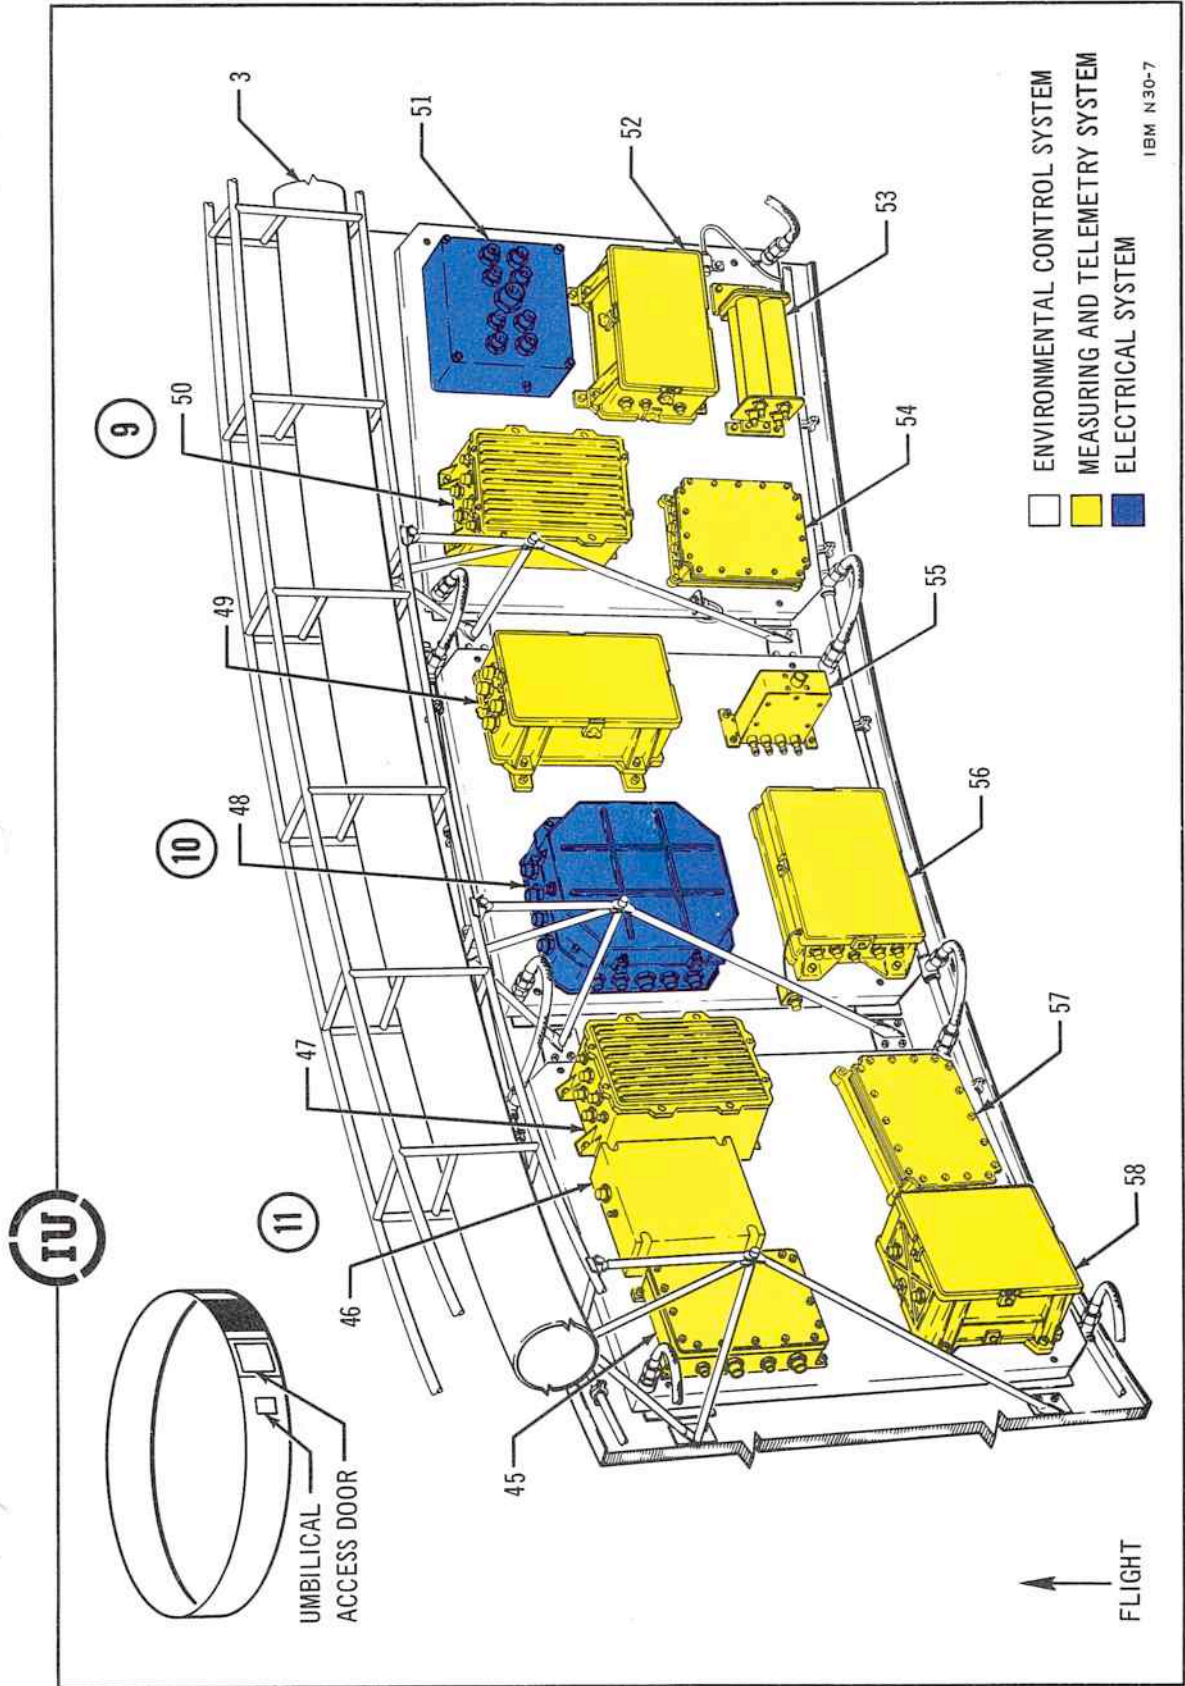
Instrument Unit Component Locations (sheet 7 of 19)
